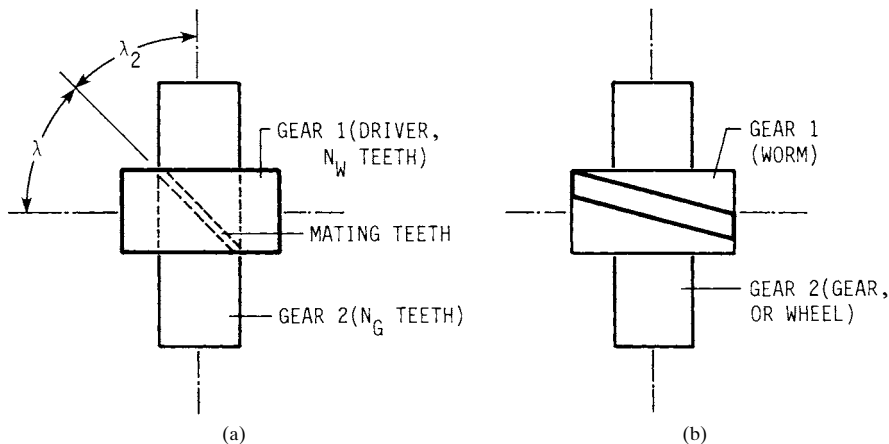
(a) Helical gear pair; (b) a small lead angle causes gear one to become a worm.
